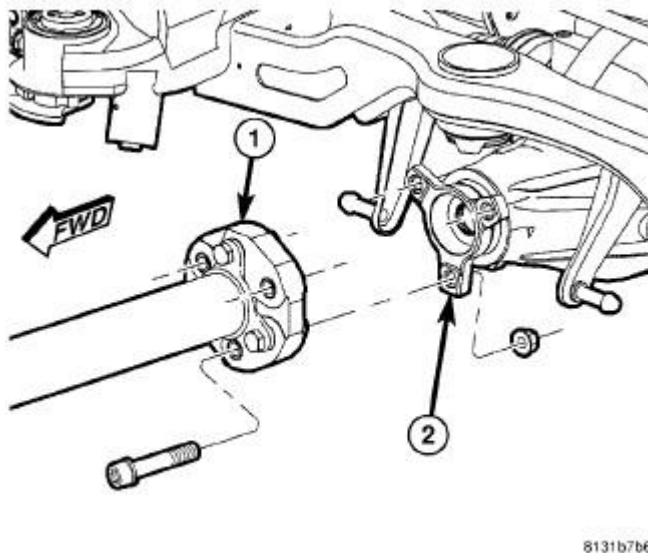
Propeller Shaft Coupler & Rear Axle Flange
